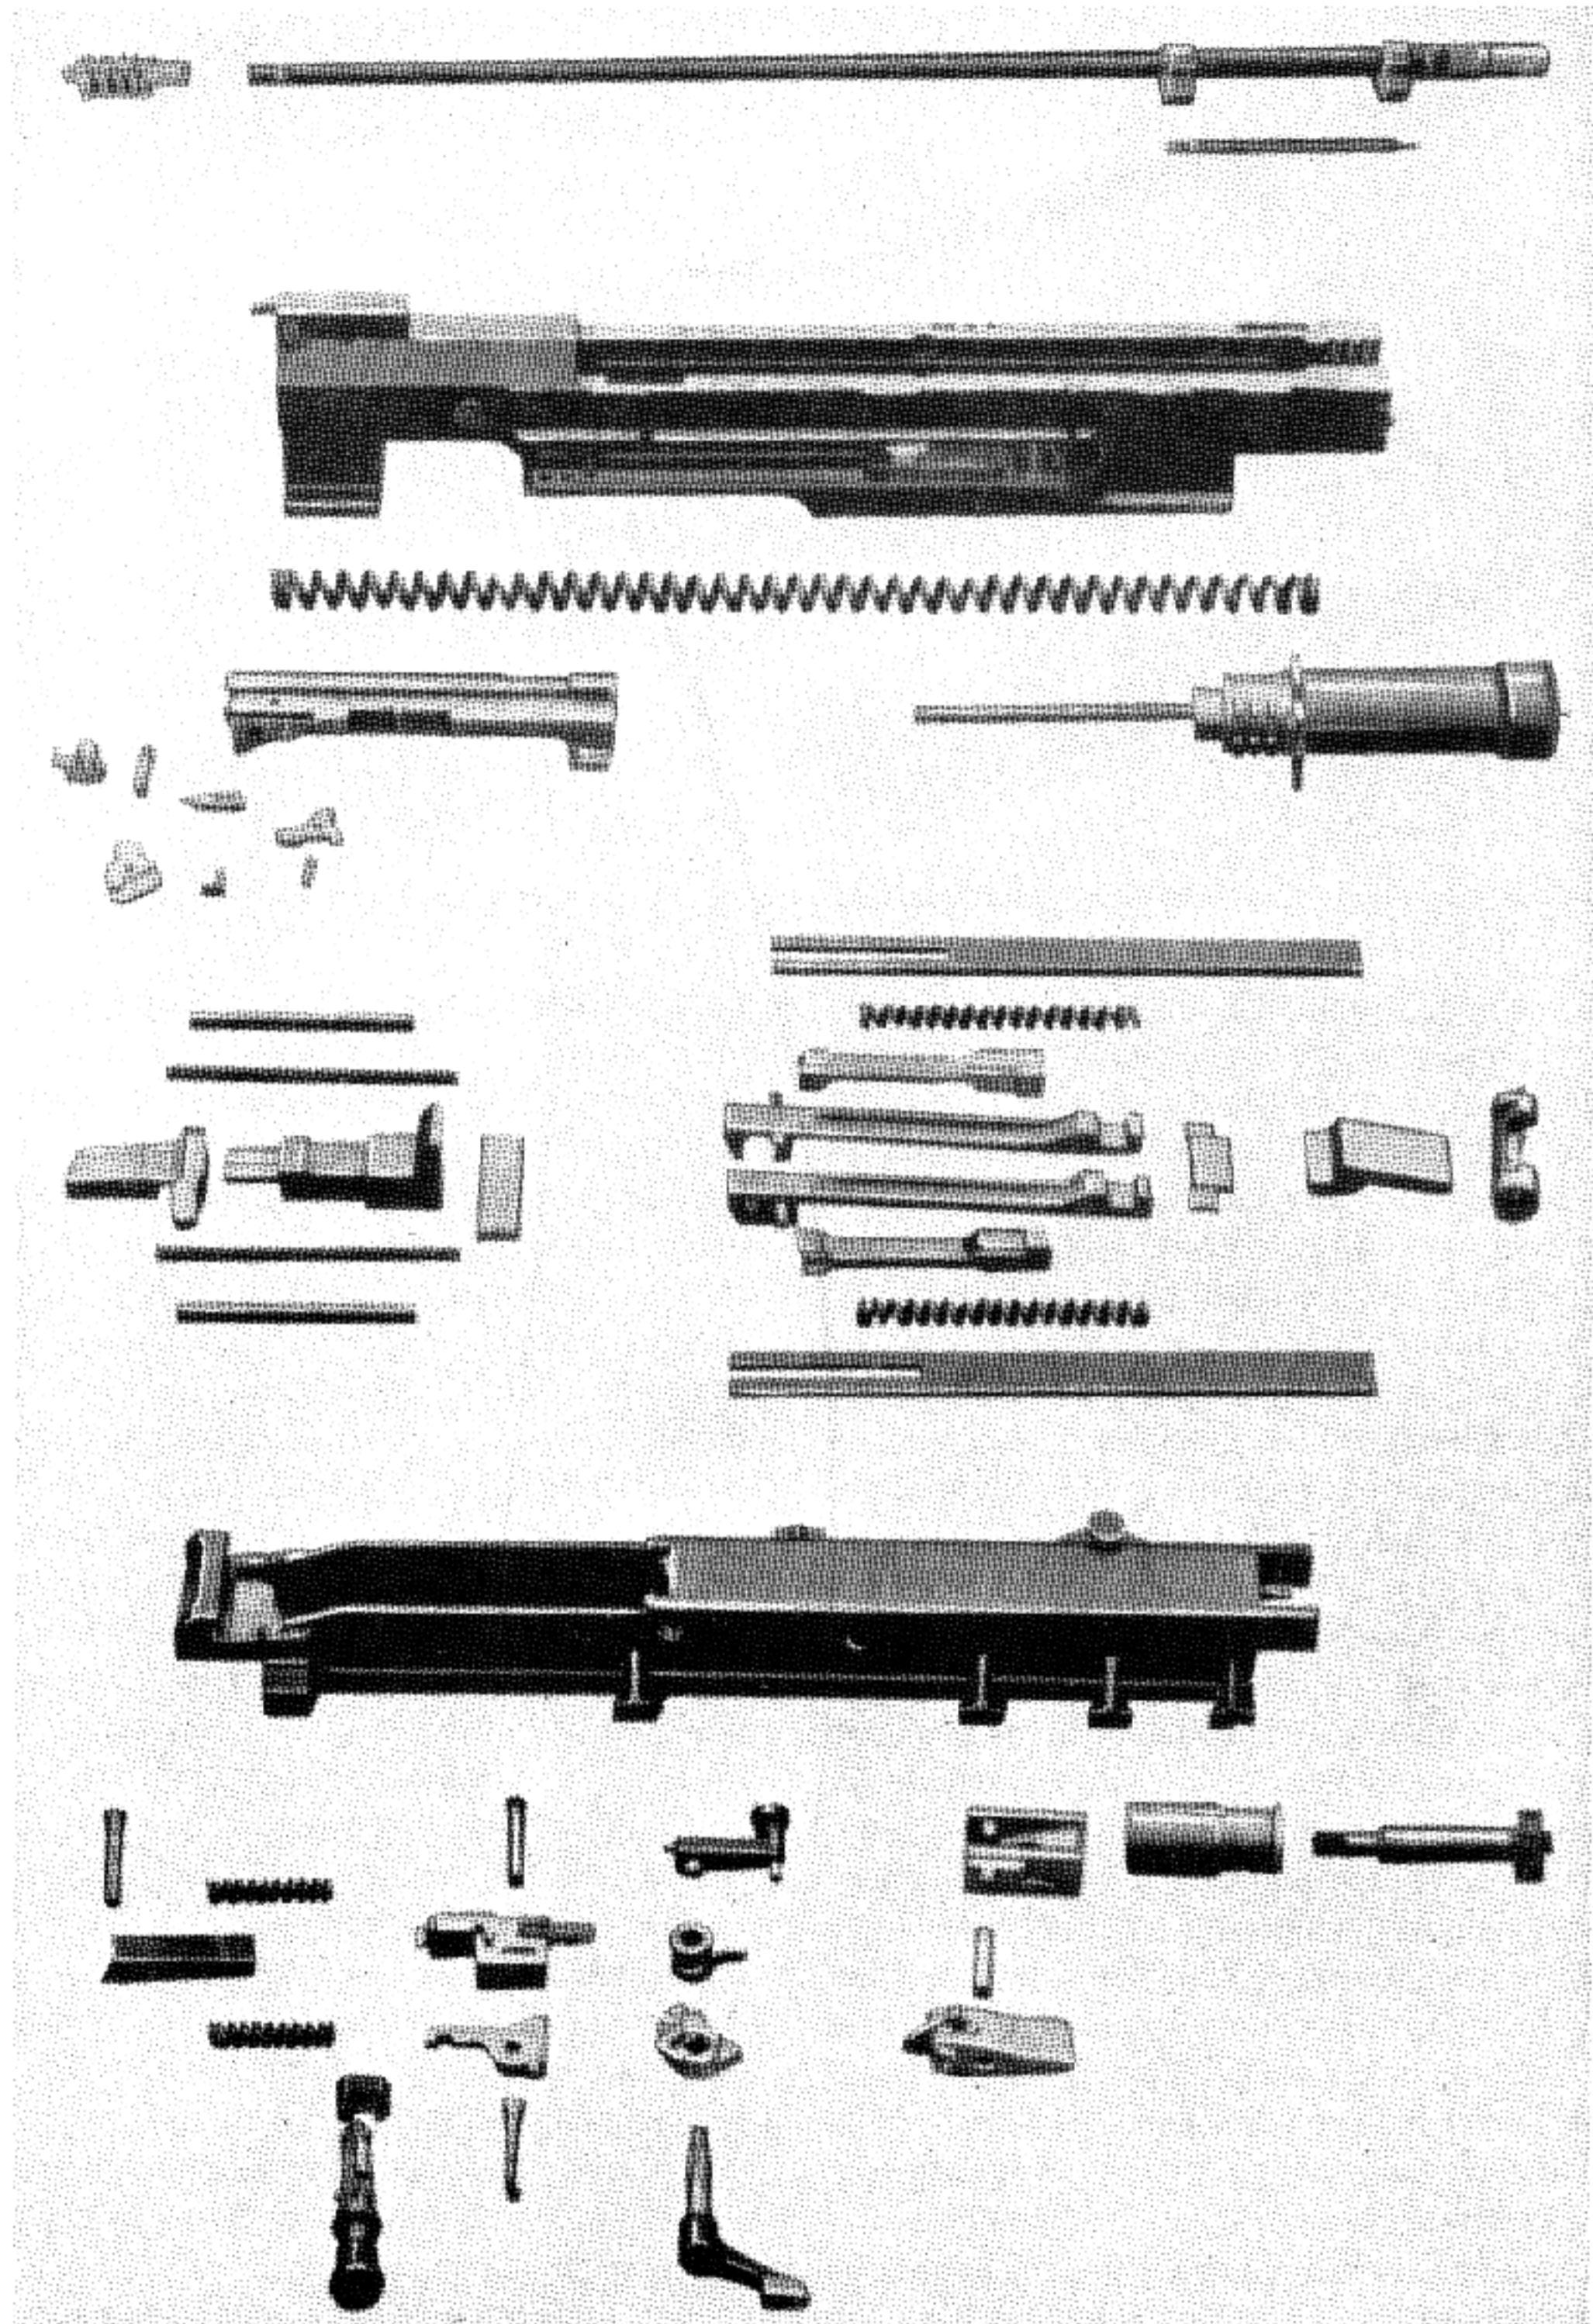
20-mm Automatic Gun 5TG, completely disassembled (barrel not to scale).
